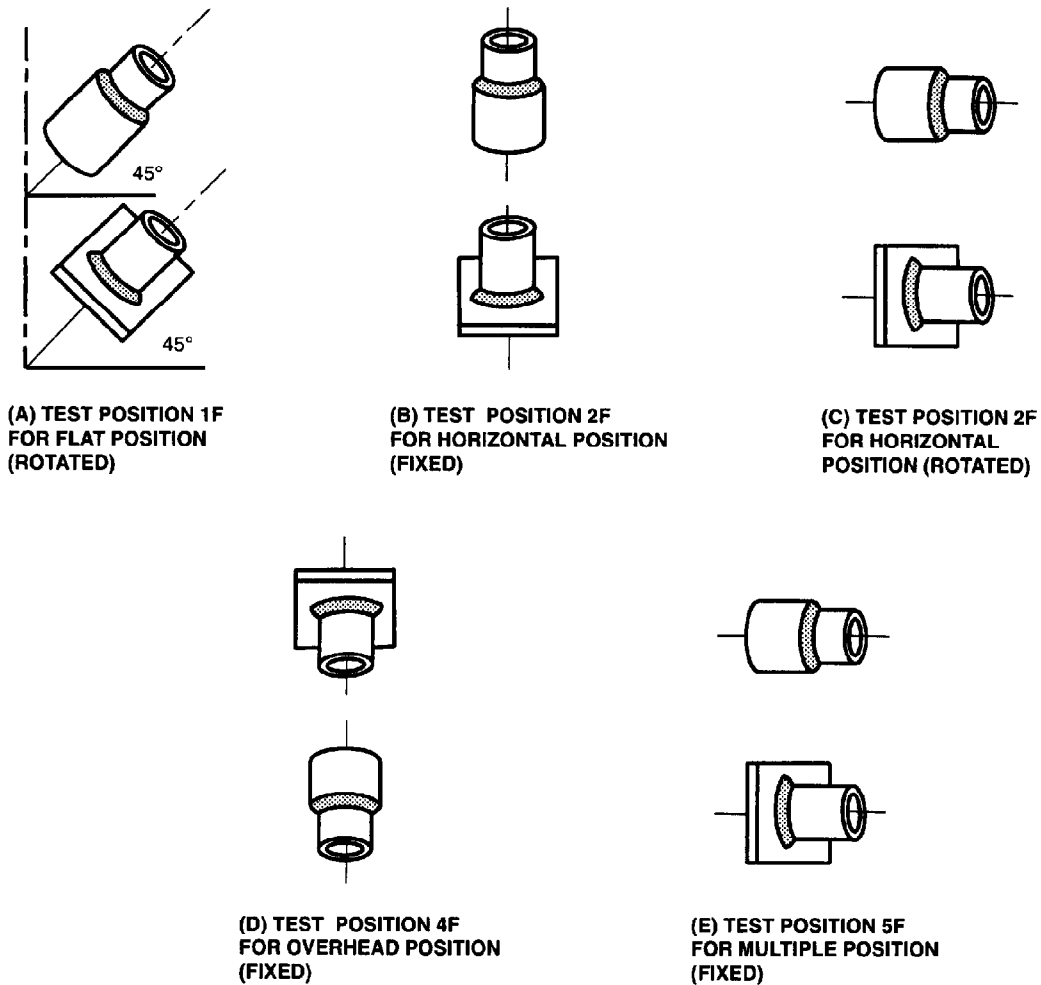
Positions of Test Pipes or Tubing for Fillet Welds (see 4.2.4)
